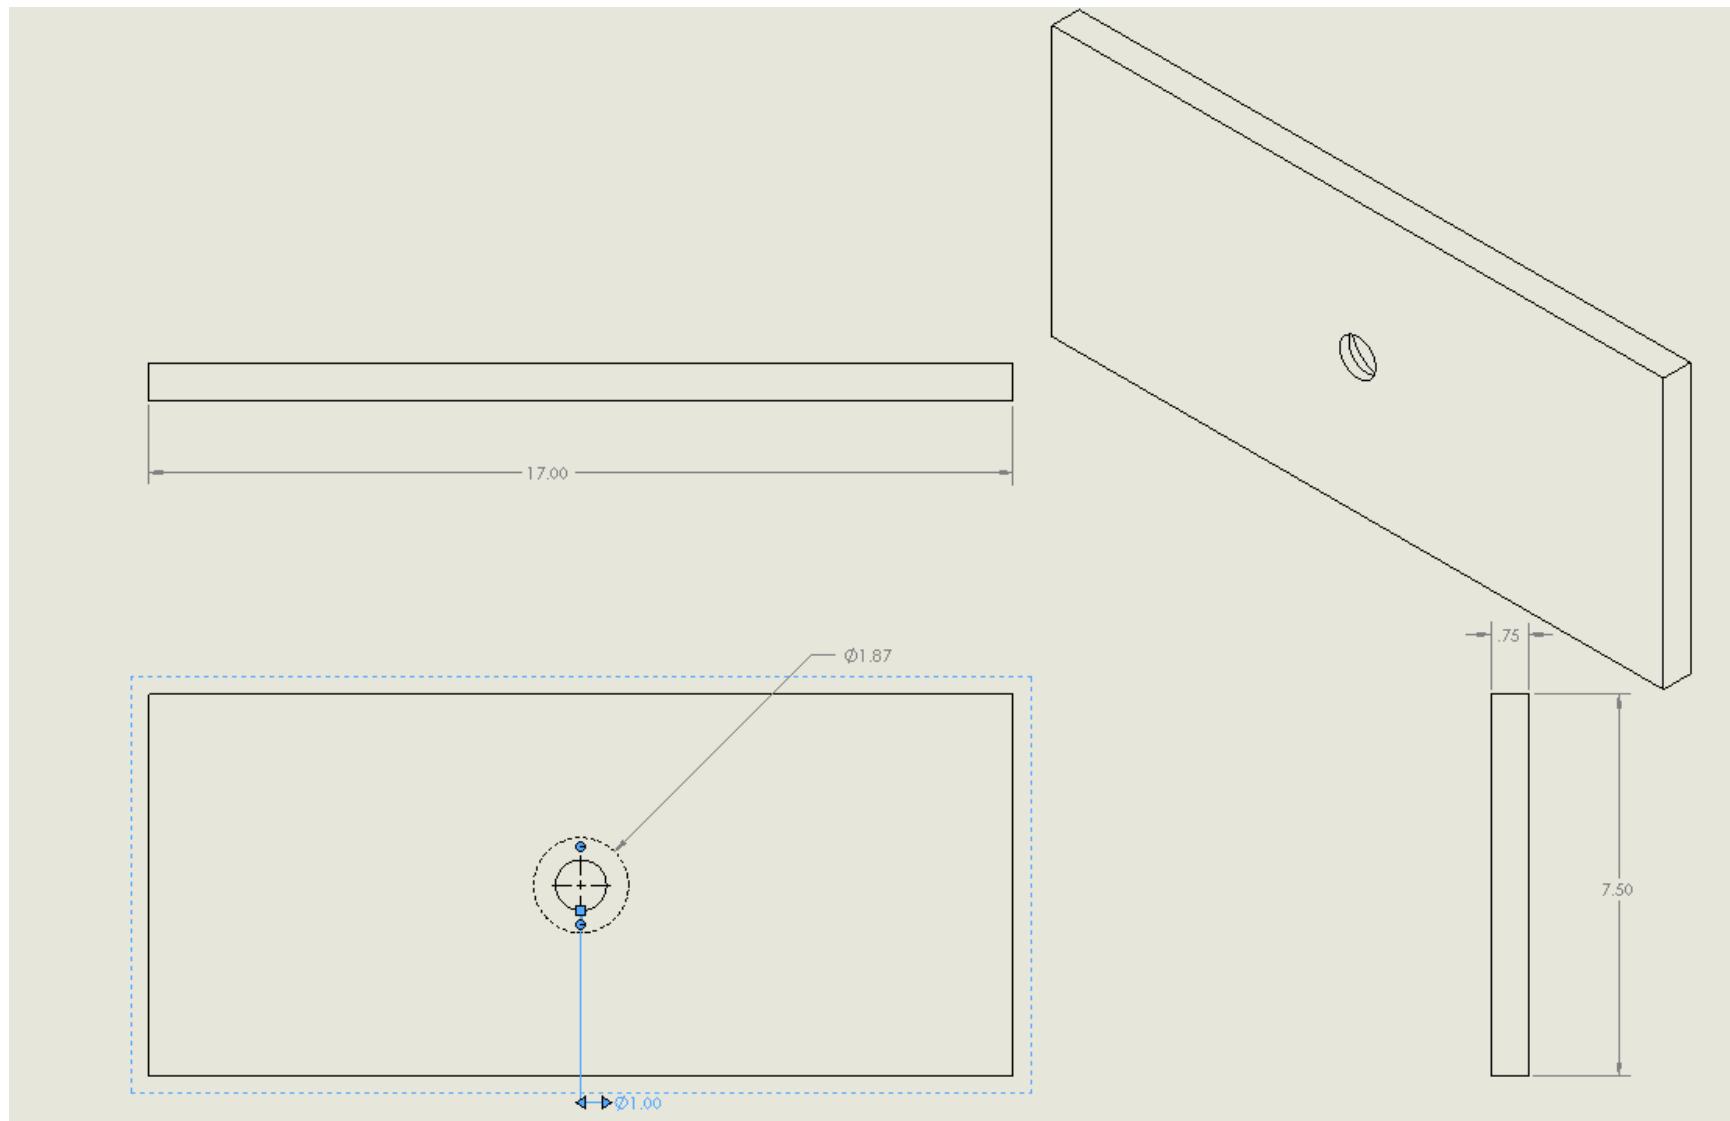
Part 1014 (Acrylic Sheet) Part Drawing
